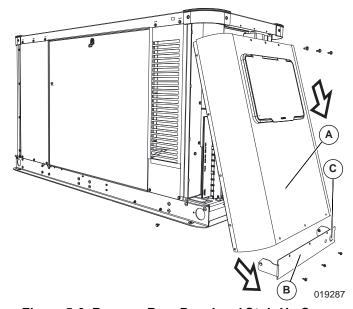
Remove Rear Panel and Stub-Up Cover
